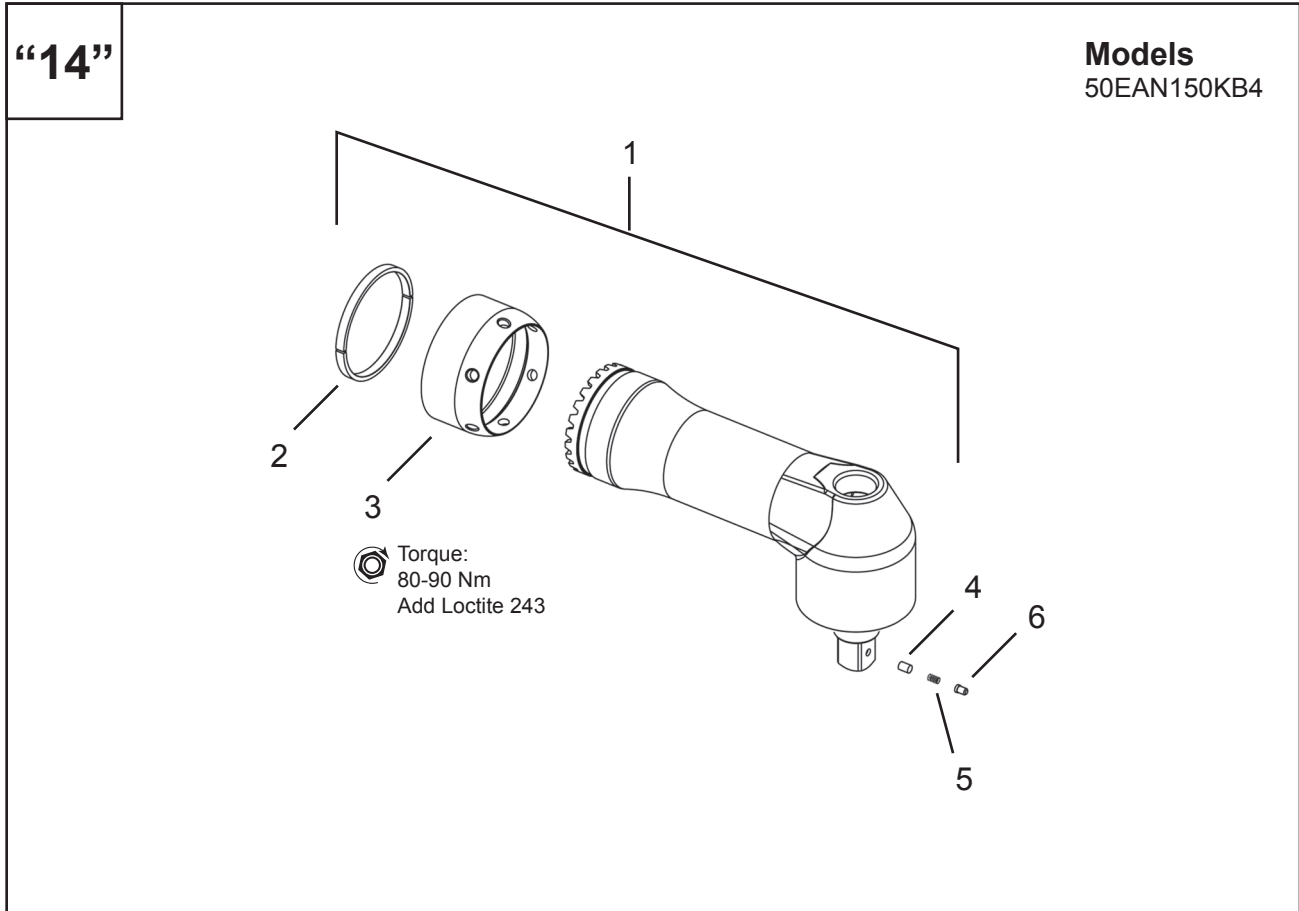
”: 302176PT Angle Head Attachment (KB4)
